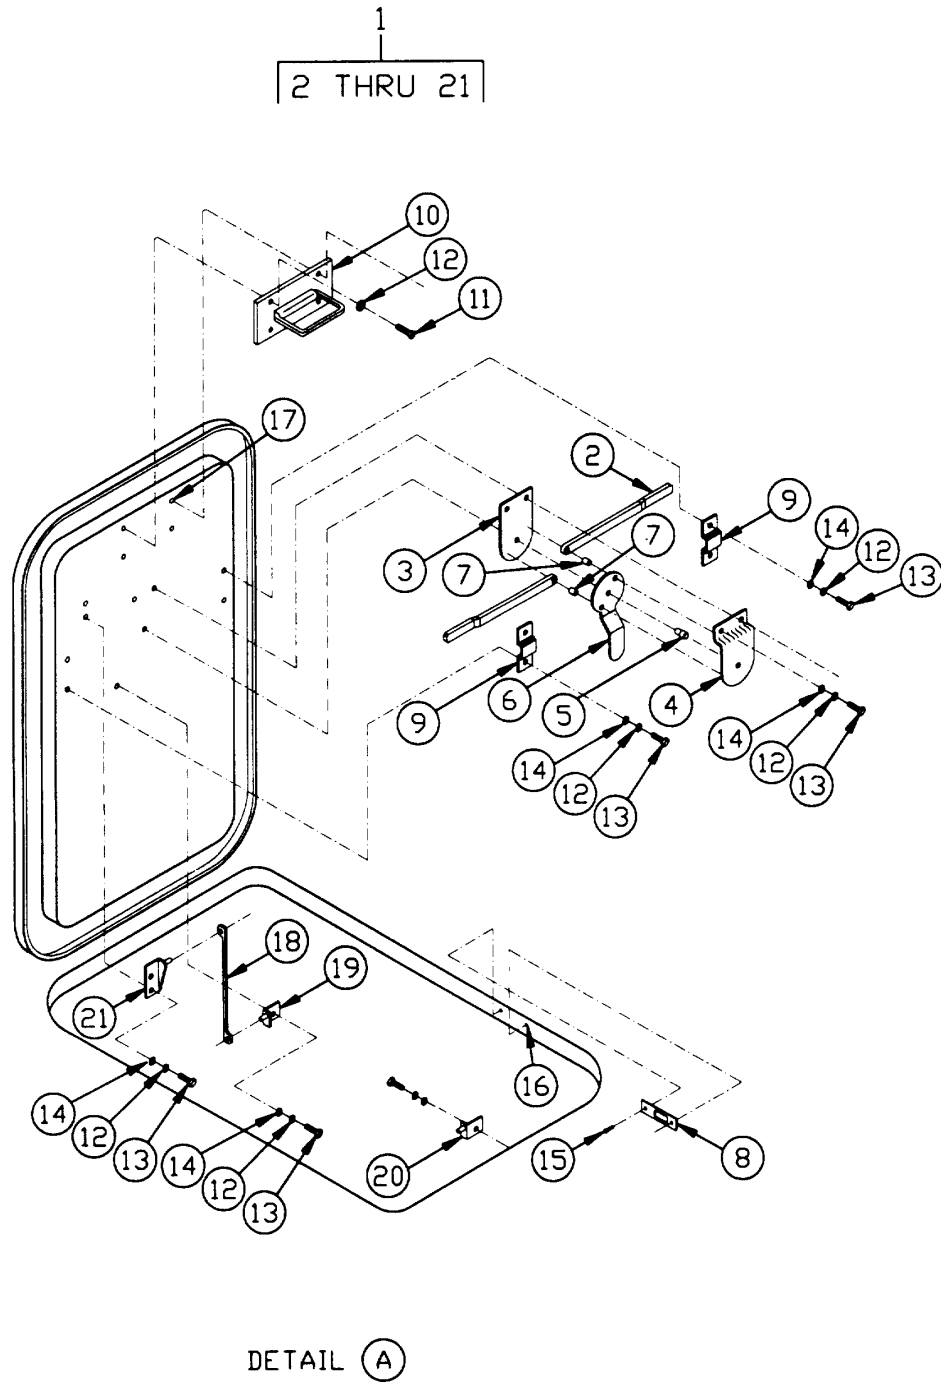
ESCAPE HATCH ASSEMBLY (SHEET 2 OF 2)
